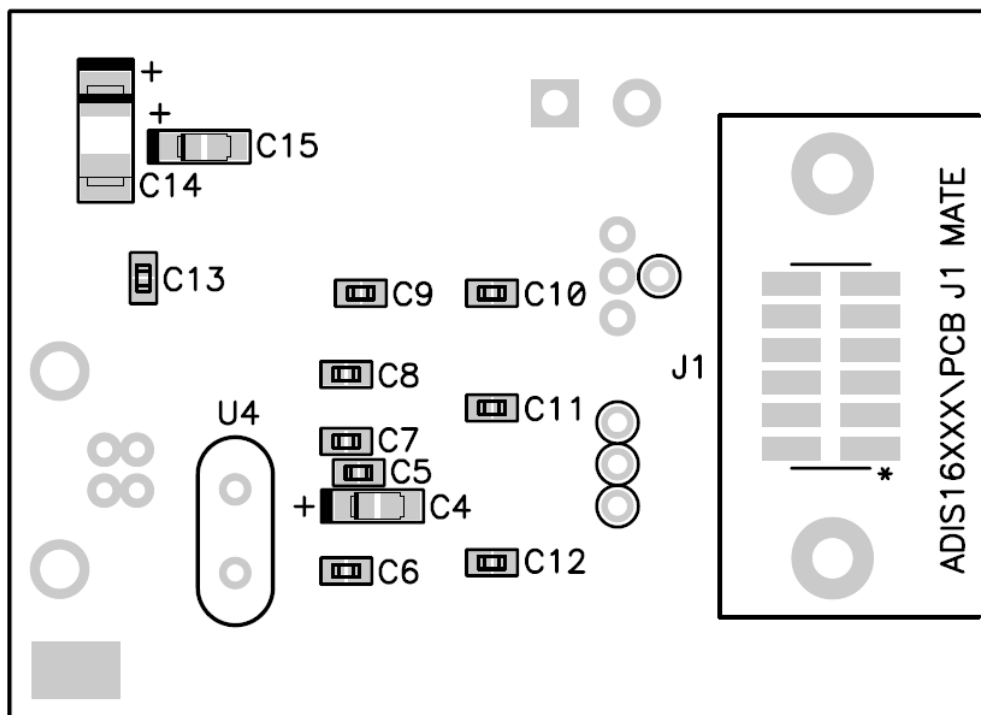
iSensor™ PC-USB Interface Board Layout (Bottom View)
